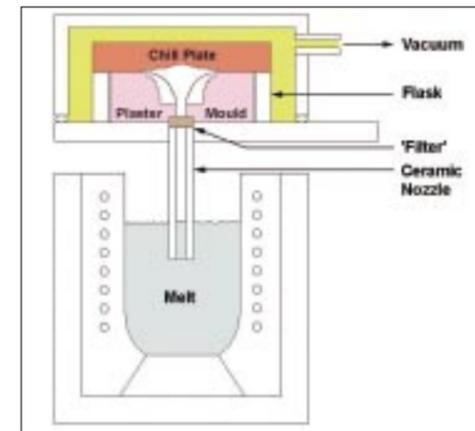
Schematic of atmospheric pressure furnace configured for plaster mould casting process.
